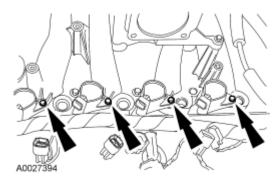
Ignition Coils & Bolts Courtesy of FORD MOTOR CO.
